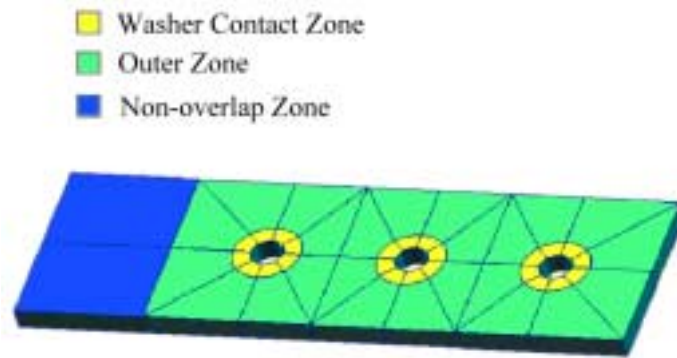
Zones in the upper plate of the joint (three bolt, protruding head)
